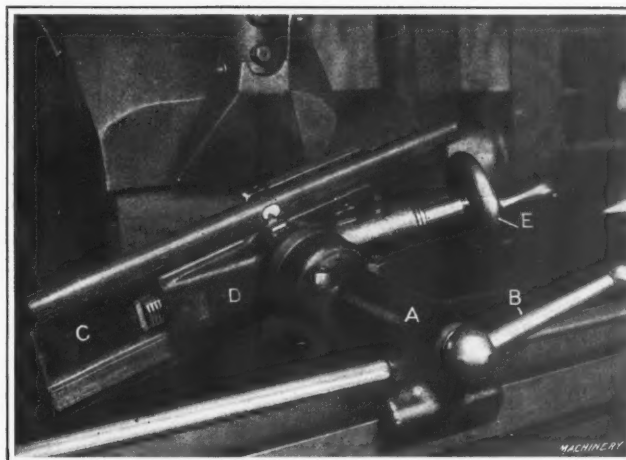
Wheel Truing Device used in producing Concavity in Face of Wheel for crowning Pulleys on Norton Plain Grinding Machines
